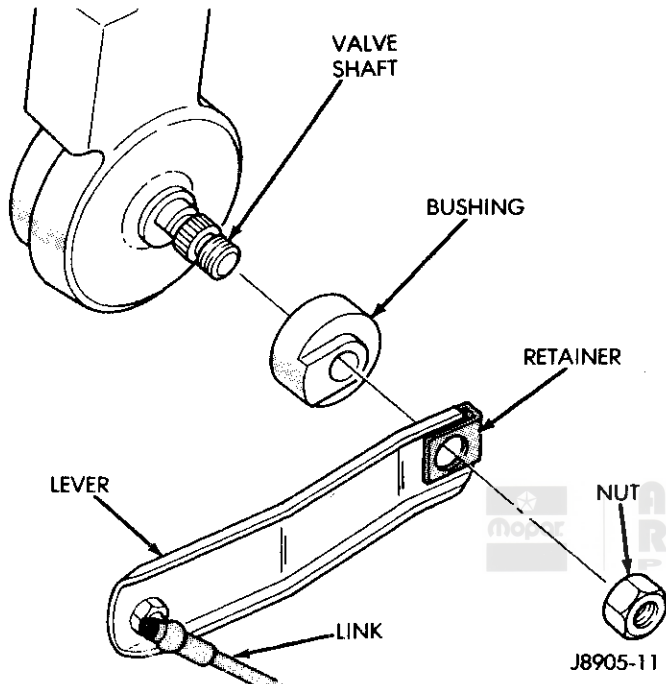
Proportioning Valve Lever, Link And Bushing—MJ
